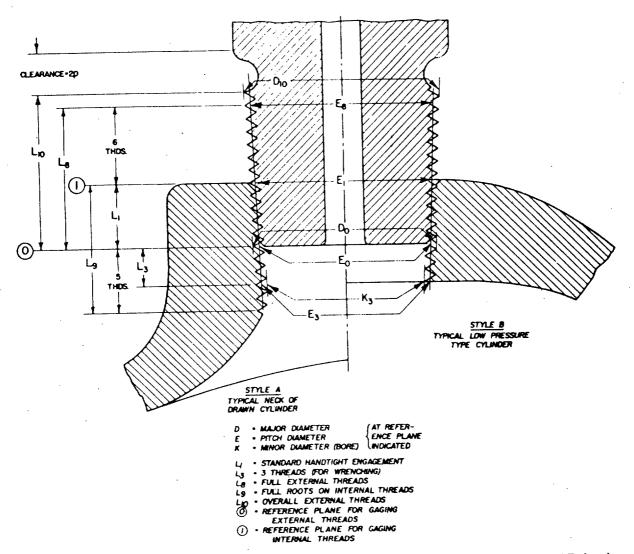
Relationship between internal and external thread dimensions of NGT, NGT(Cl), and SGT threads.
